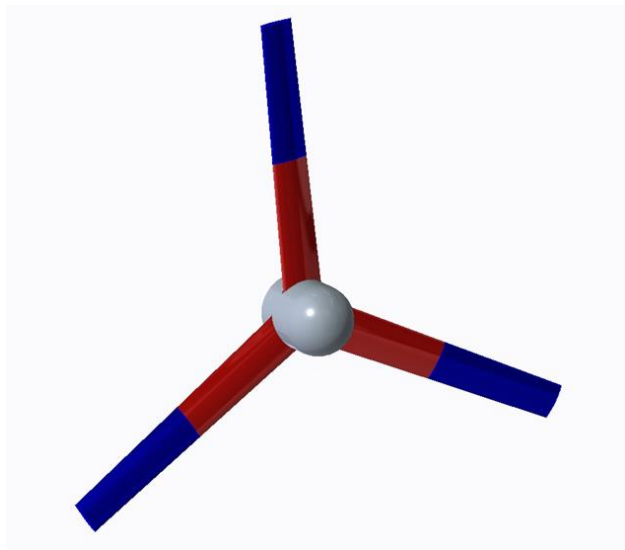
3D CAD model of the assembly that incorporates a 5.5° angle of attack that is optimal for the NREL S822 aerofoil
